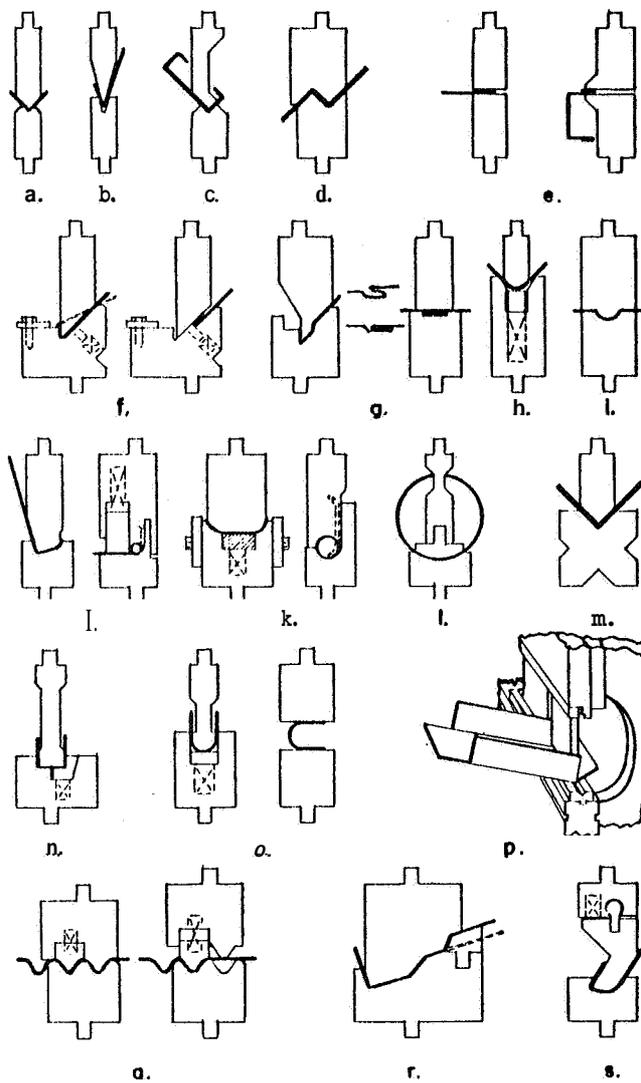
TYPICAL PRESS-BRAKE-BENDING AND FORMING DIES (Ref. 70)
